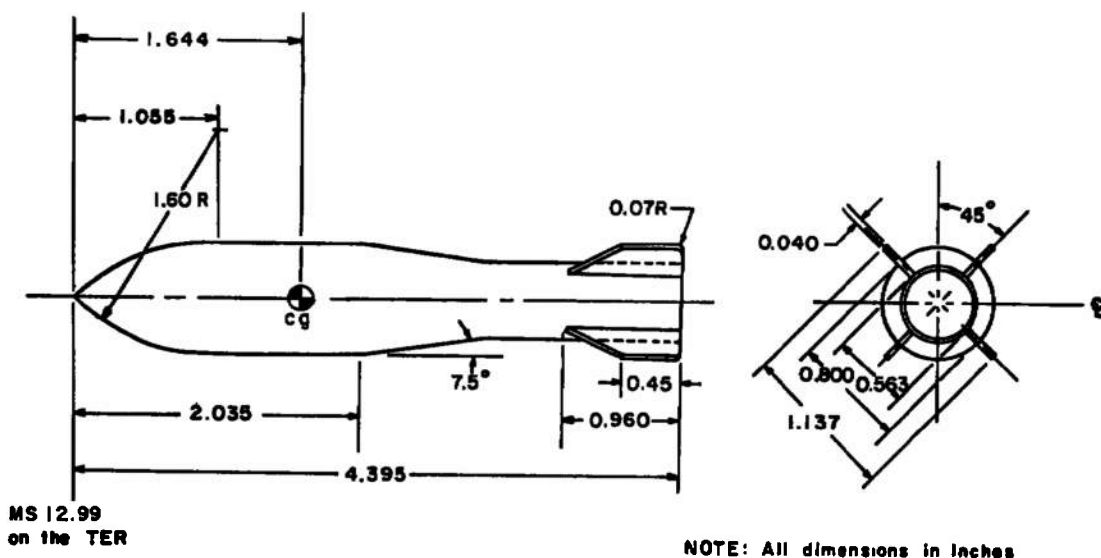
Dimensional Sketch of 1/20-Scale M-117 Bomb Model
